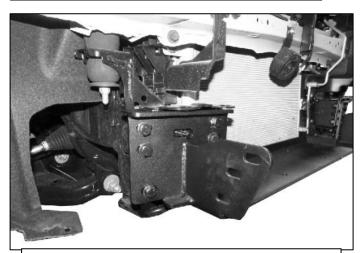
Reinstall active shutter assembly using the top three mounting points. Reattach the wire harness and connect to all parking sensors and TSS module.
